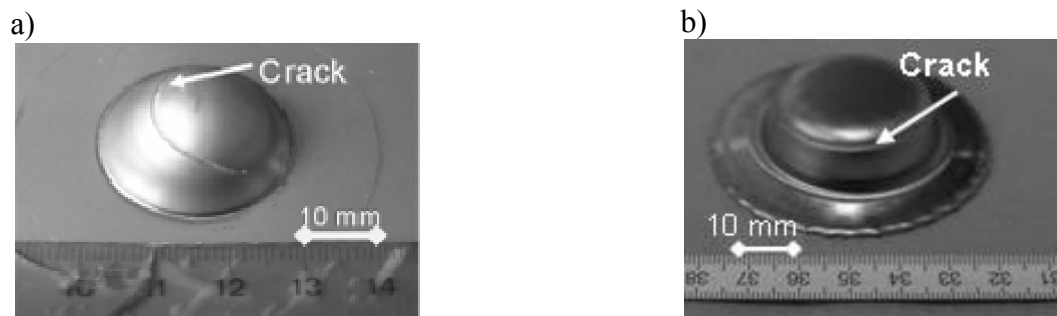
Erichsen stretch forming (a) and deep drawing (b) tests
